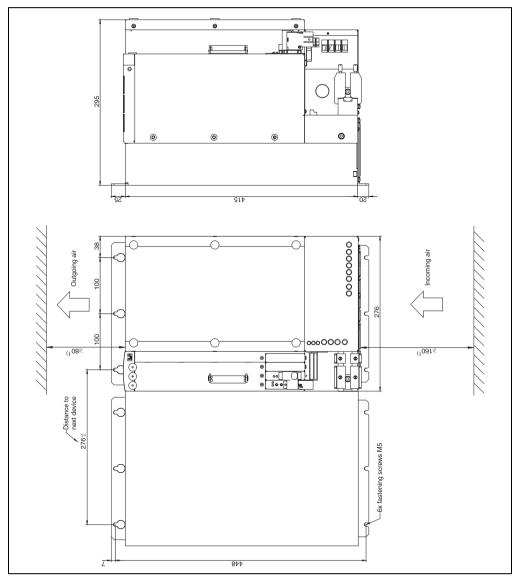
Dimensional diagram and installation dimensions for ACOPOS 1640
